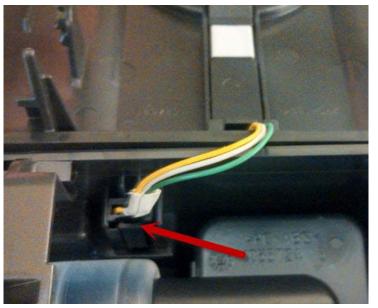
FLIP LID ASSEMBLY WIRE HARNESS REMOVAL
